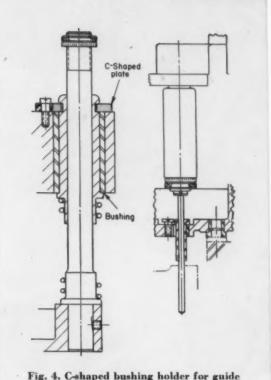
C-shaped bushing holder for guide assembly speeds insertion of adapter and tool in the machine.
